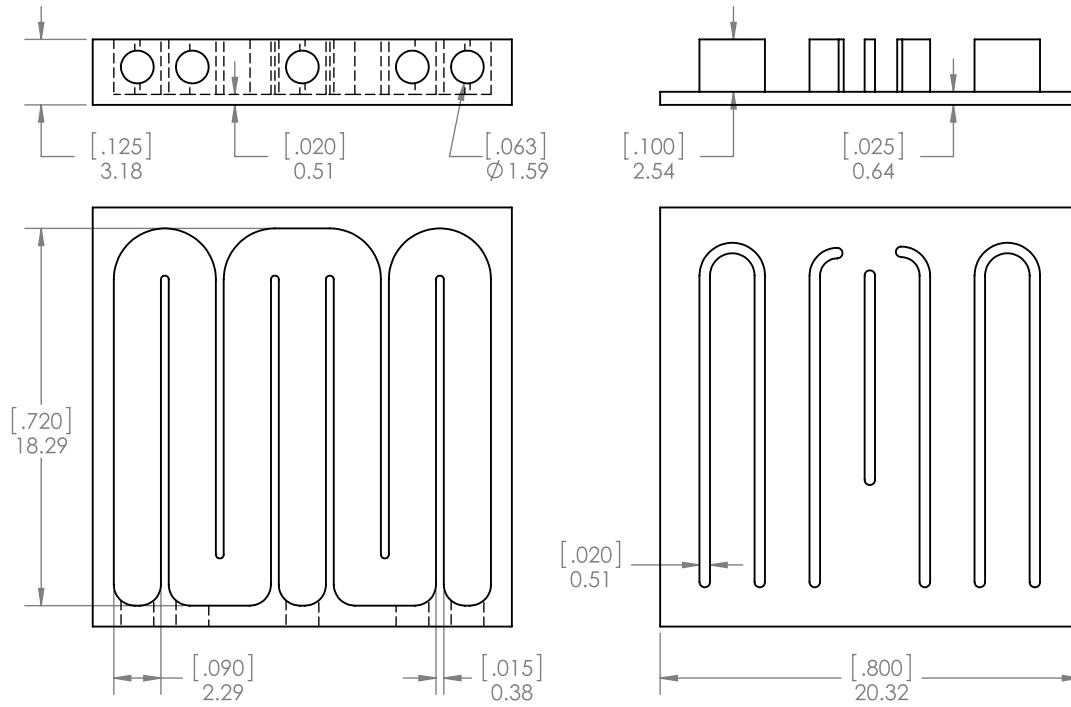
Drawing of the microburner body (left) and lid (right) dimensioned in mm [inches].
